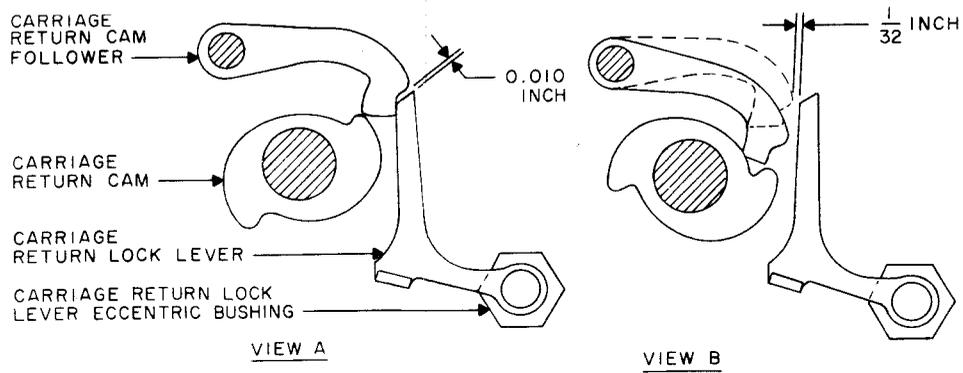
Carriage Return Lock Lever Eccentric Bushing Adjustment
